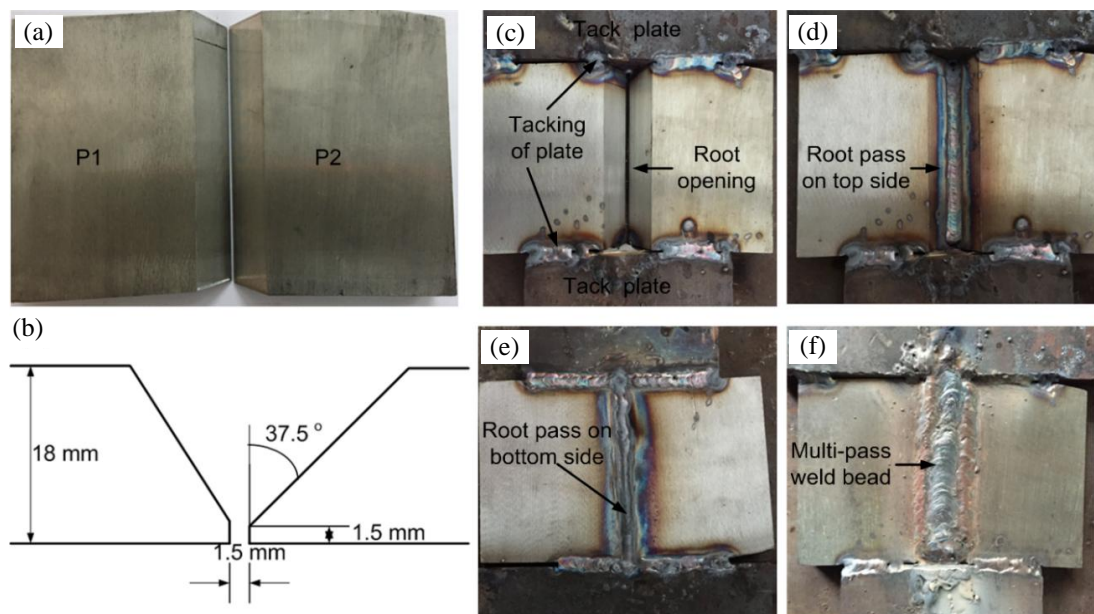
(a) Machined and grooved plate, (b) Groove design, (c) Plate after tacking, (d) After root pass on top side, (e) After root pass on bottom side and (f) Plate after completion of filling pass
